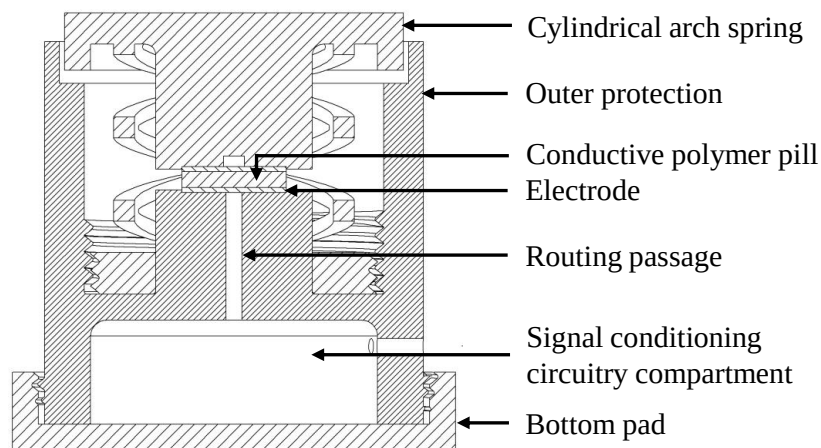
Component arrangement of the tactile sensor in the assembly.
